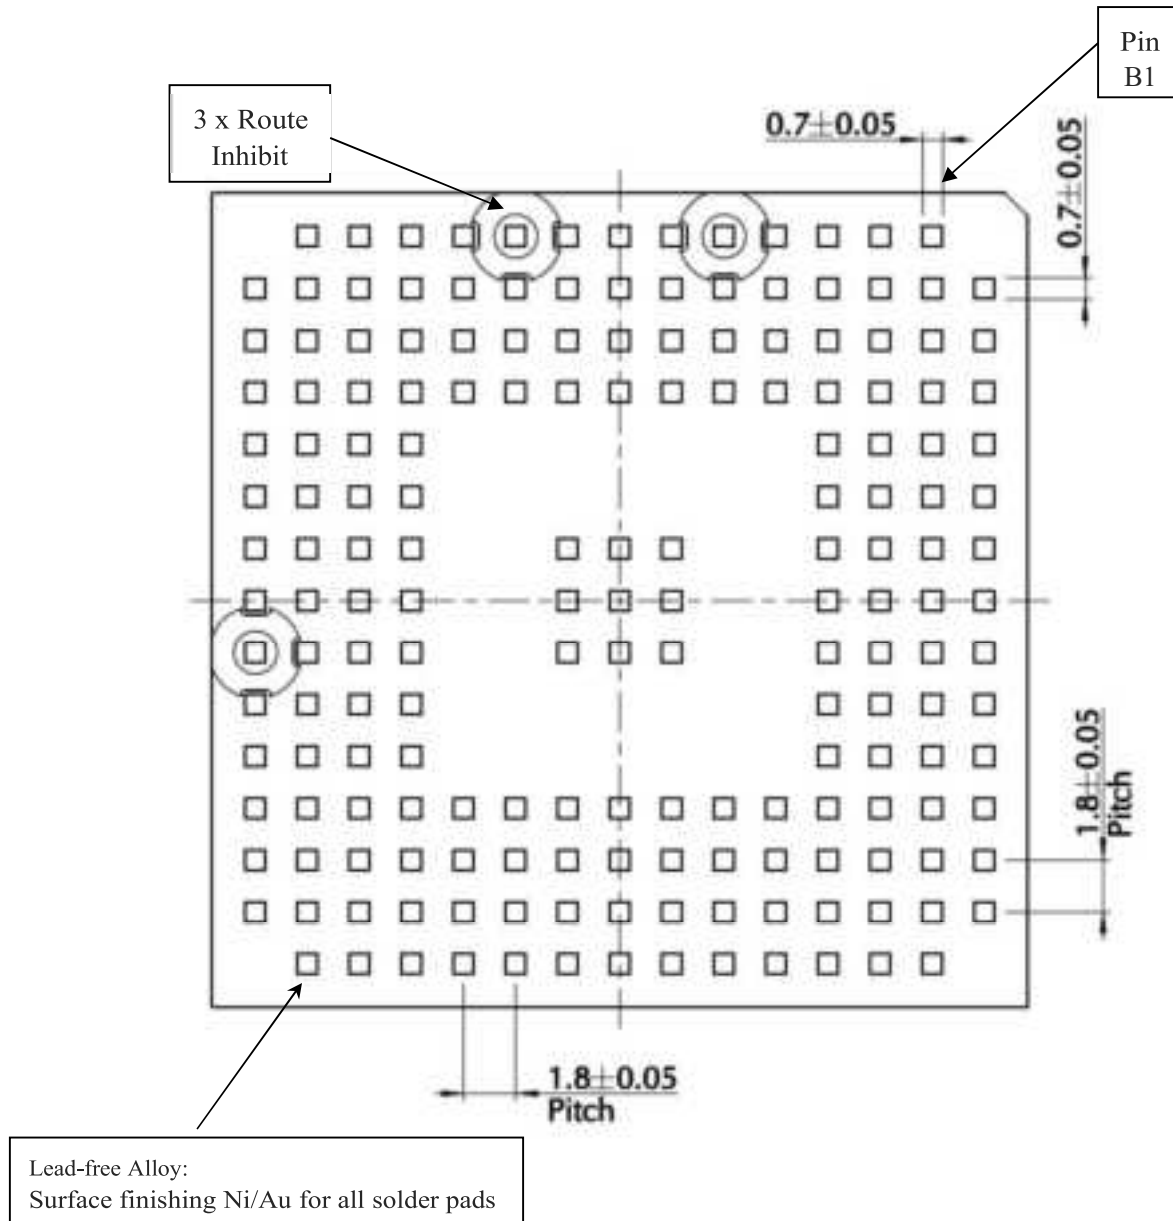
LE910Cx Mechanical Dimensions (Bottom View) except for LE910Cx-WWX
